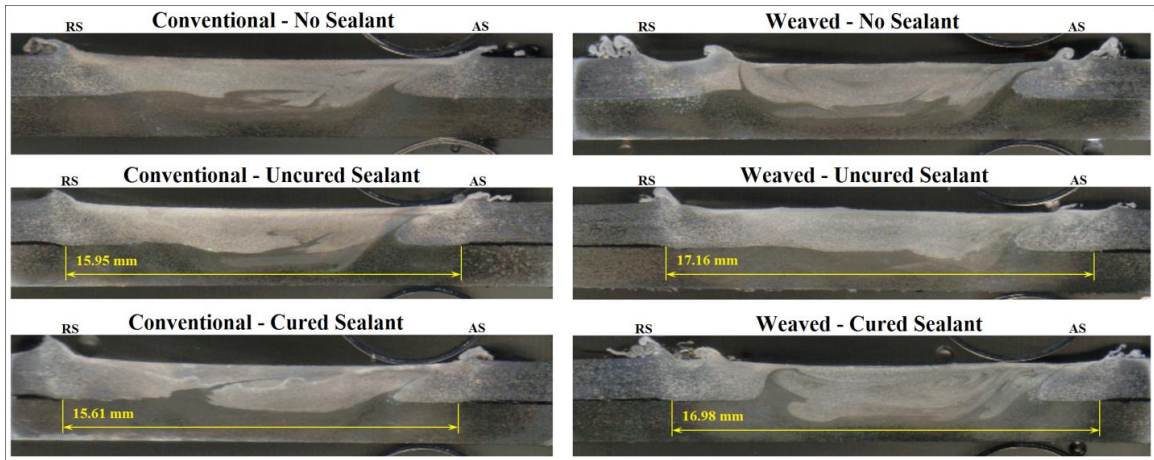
Weld Macrographs; Faying Surface Sealant is Visible at Edges
